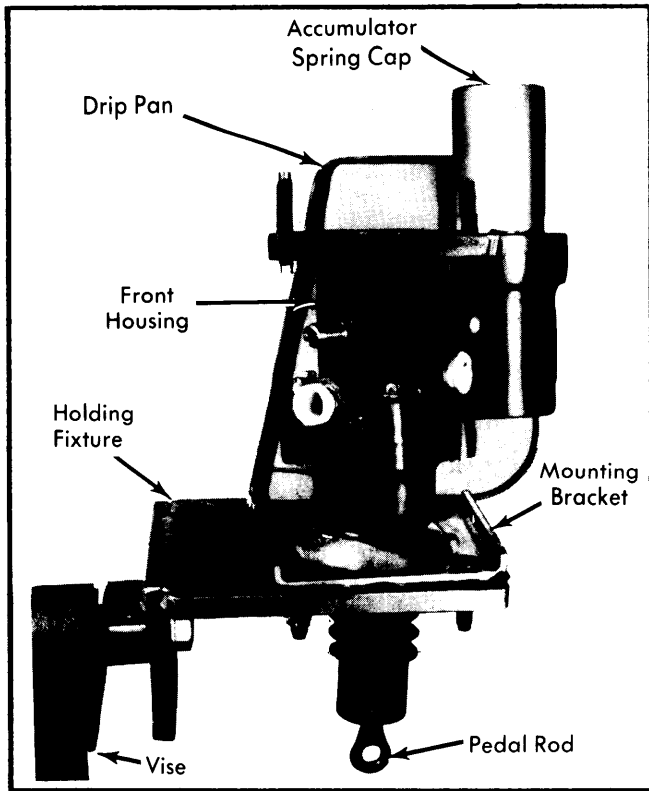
Mounting Booster on Holding Fixture and Clamping Fixture in a Vise for Booster Disassembly (Cadillac Shown)
